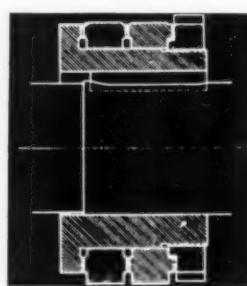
Method for altering pump timing; sleeve is keyed to camshaft and engages with serrations on face of cams.
